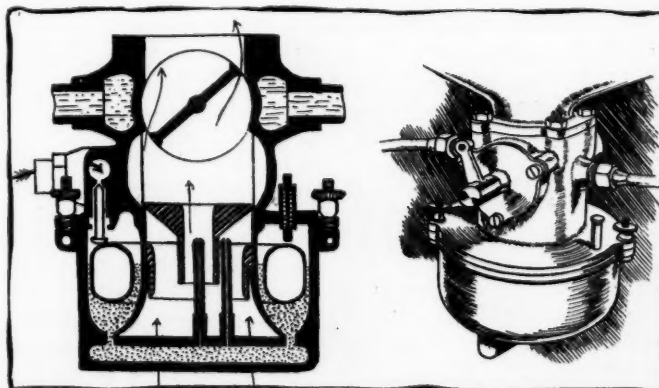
Sectional and exterior views of the 1913 Deasy carburetor
